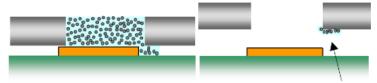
Smeared solder paste under stencil<sup>5</sup>.
